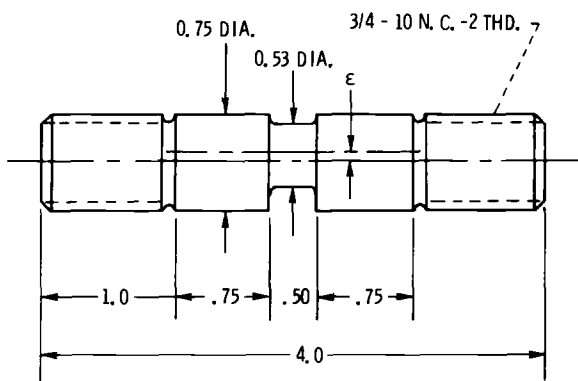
Eccentric verification specimen. All surfaces except test section concentric with pitch diameter of threads within 0.001 in total indicator reading. All dimensions in inches (inch = 1000 mils = 25.4 mm).
